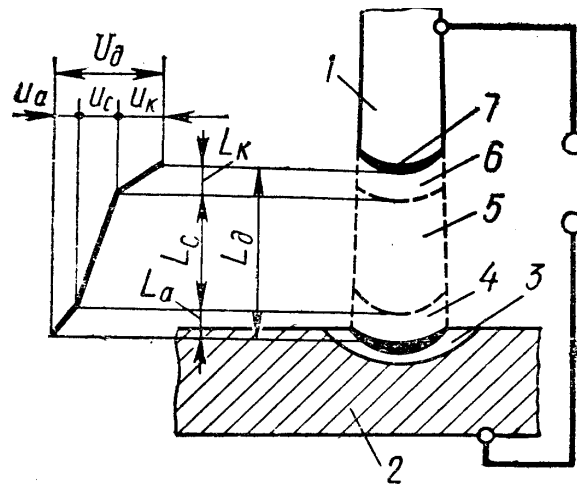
Scheme of the welding arc and the voltage drop in it:
